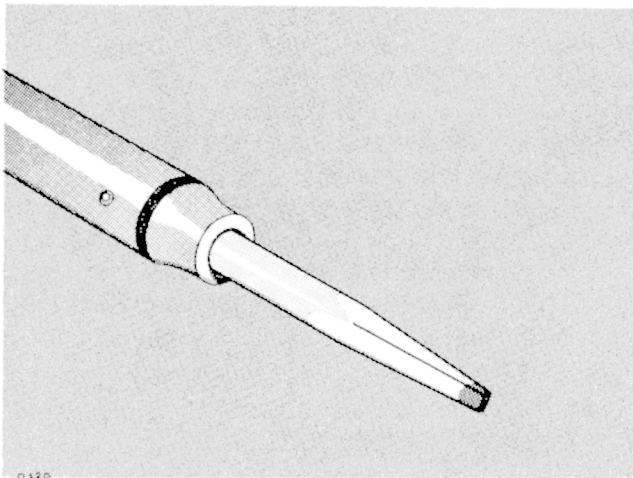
Soldering iron tip properly shaped and tinned.
